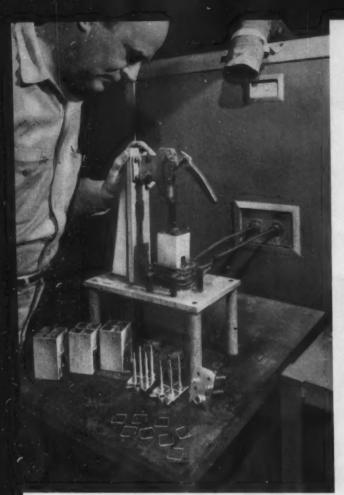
These preselector units are assembled with three types of solder, initial joints being made with high-melting-temperature solder. In the final operation seen here, preformed soft solder is used.
